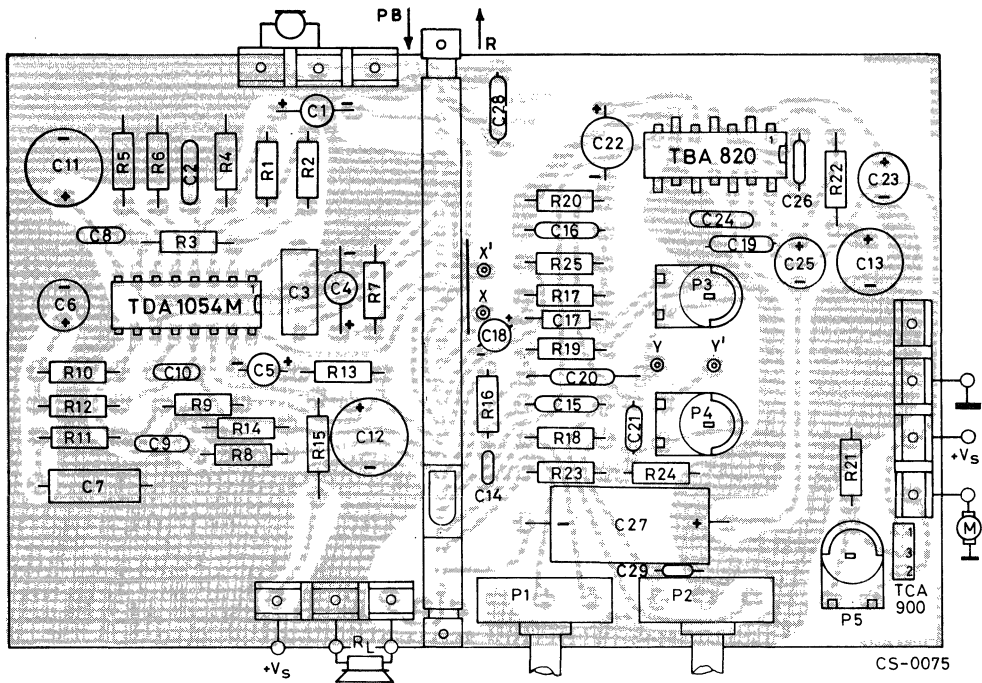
P.C. board and component layout for the circuit in fig. 21 (1:1 scale)
